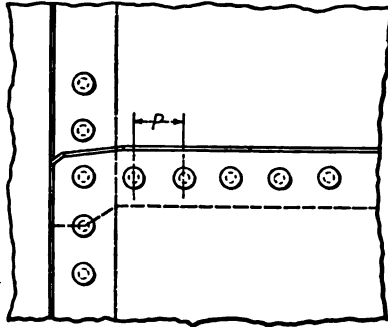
LAP JOINT, LONGITUDINAL OR CIRCUMFERENTIAL, SINGLE-RIVETED.
